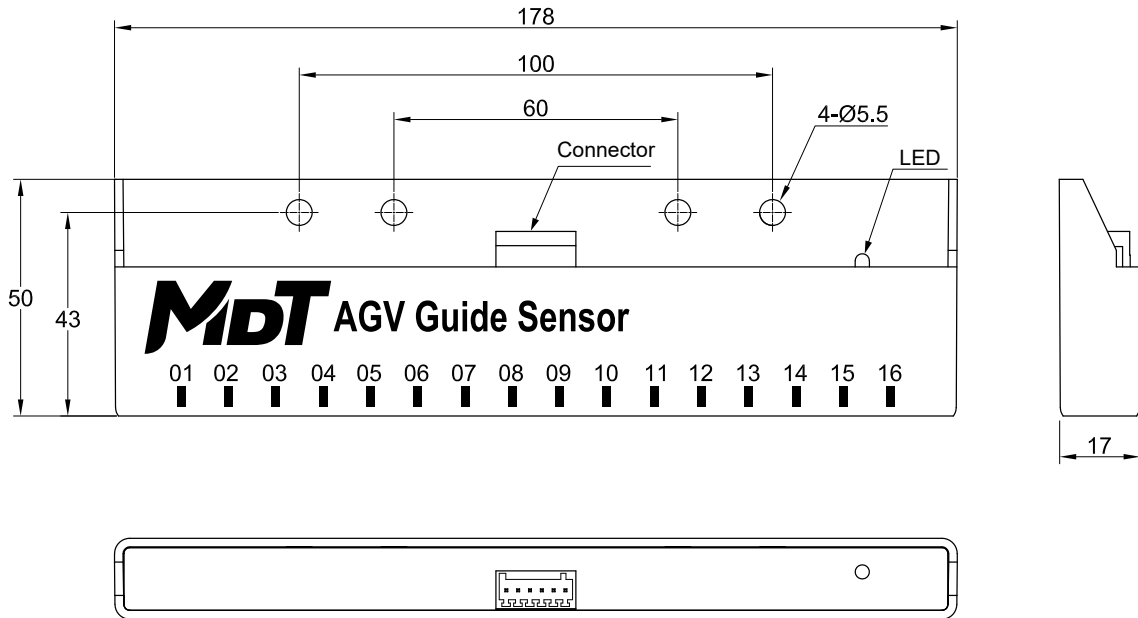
AGV-TMR25X4, AGV-TMR25XC Package dimensions diagram (unit: mm)
